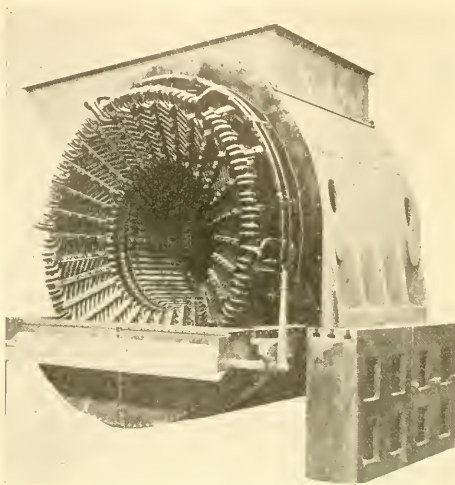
DAMPER MOUNTED ON STATOR FRAME
